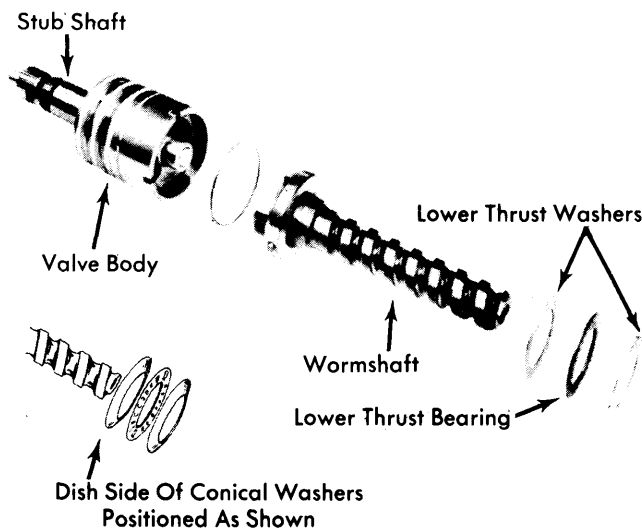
Reassembly of Valve Body and Wormshaft Assembly.
